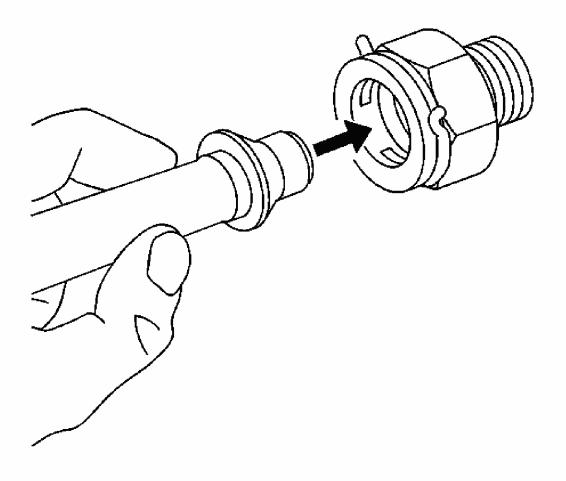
View of Engine Oil Cooler Pipes & Oil Cooler Quick Connect Fittings Courtesy of GENERAL MOTORS CORP.
